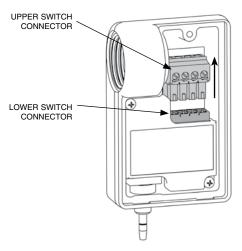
SWITCH CONNECTOR ASSEMBLY
